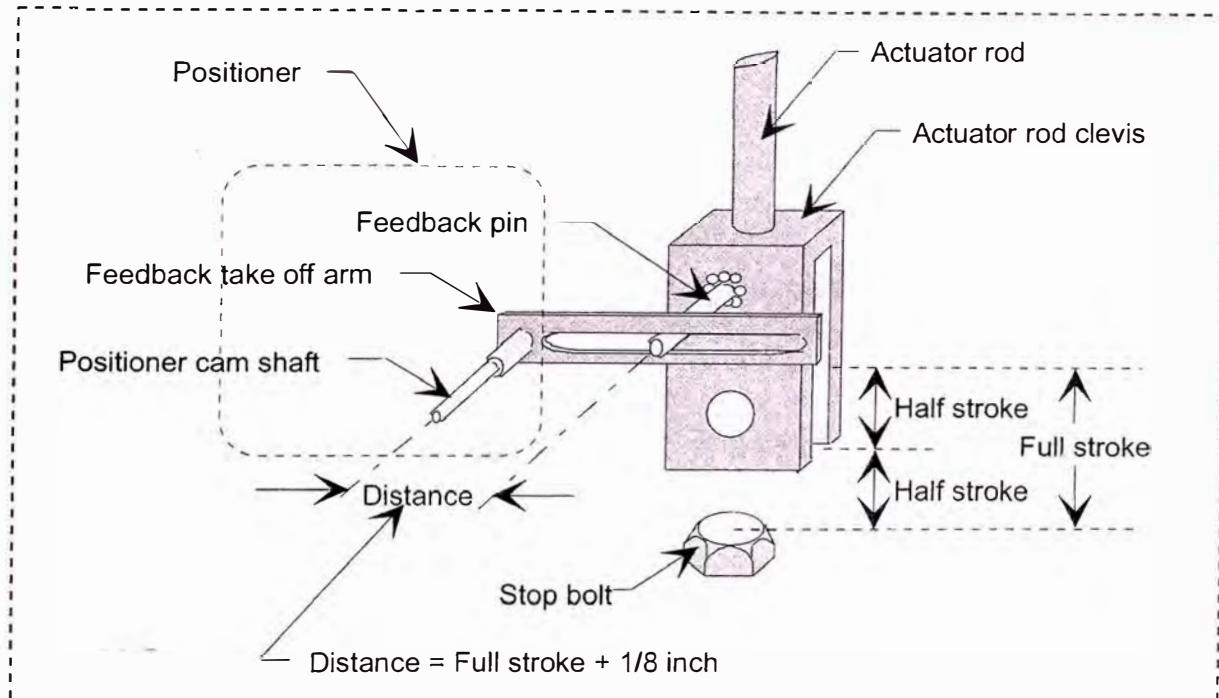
Setting rod clevis at half stroke for positioner locating
